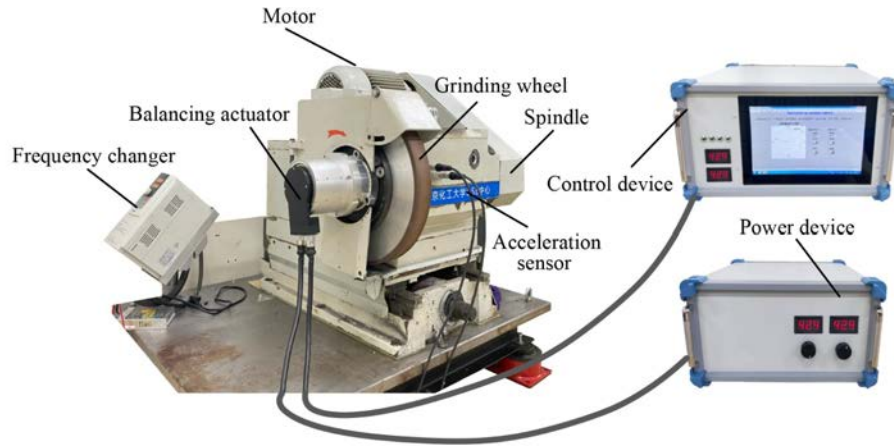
High-end grinding machine self-recovery regulation test bench.
